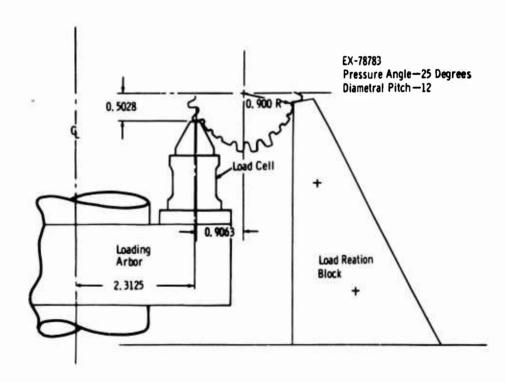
Typical Dimensions of 12-Pitch Gear Test Setup.
